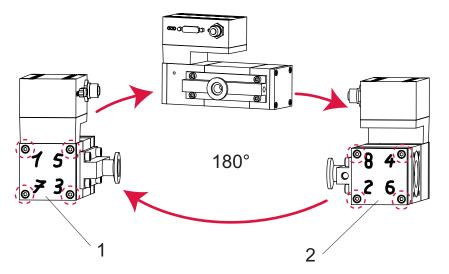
Screw assembly sequence for closing cap assembly >
